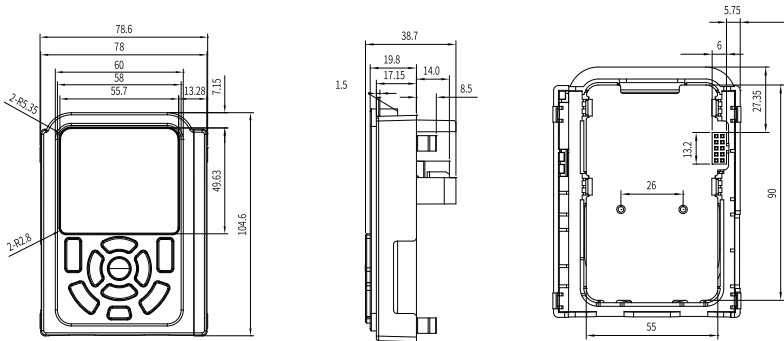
Outline dimensions of the LED operating panel of T1 to T4 models (unit: mm)
